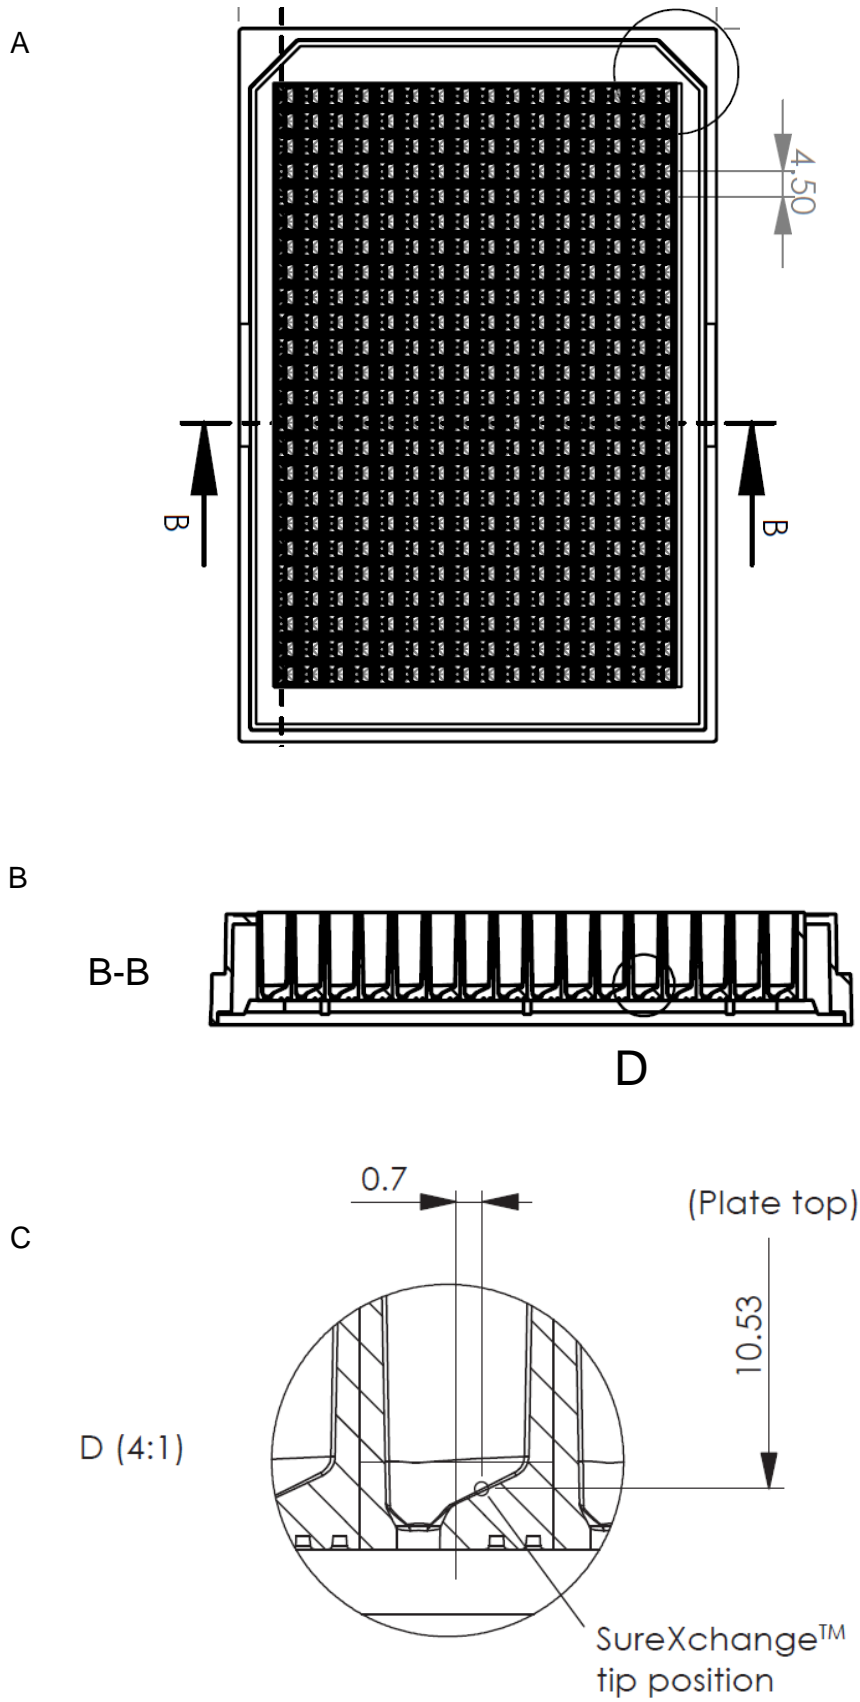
A. Vertically oriented plate layout. B. Row cross section and C. Well cross section with SureXchange™ tip position in mm.
